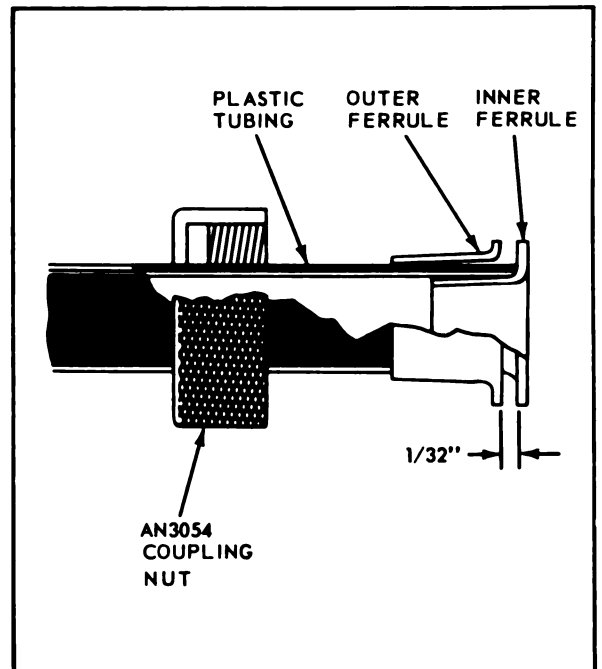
Installing Two-Piece Ferrule On Non-Metallic Conduit
